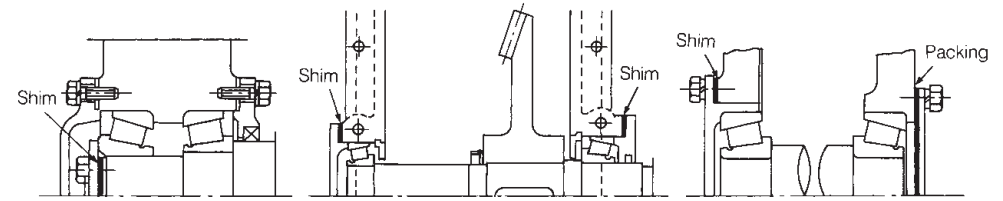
DB Arrangement whose Clearance is Adjusted by Inner Rings.
